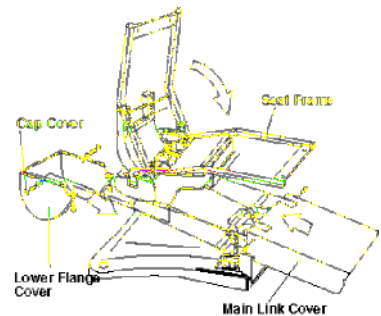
Fixing Main Link Cover and Lower Flange Cover
